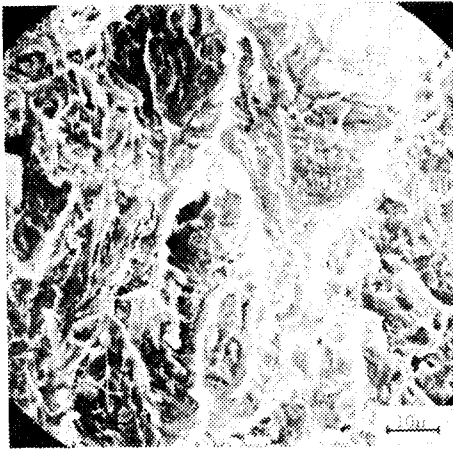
Fractographs welded specimen by dried electrode at $\sigma=75kg/mm^2$
